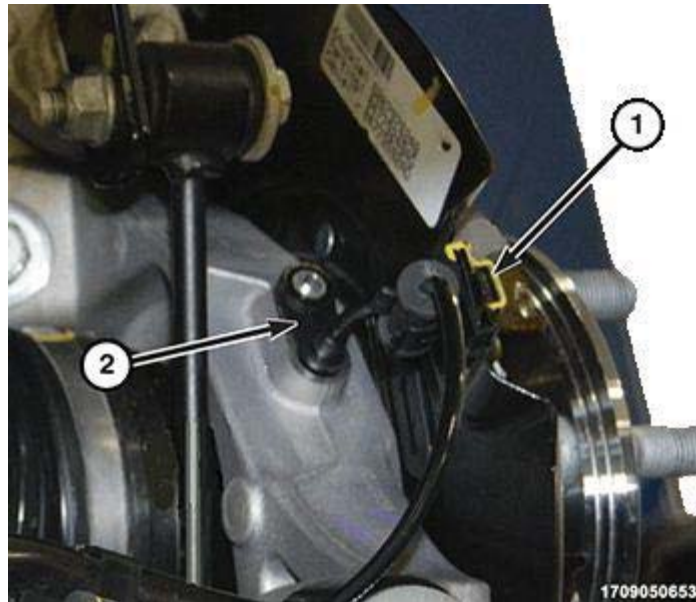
Wheel Speed Sensor Connector & Knuckle
